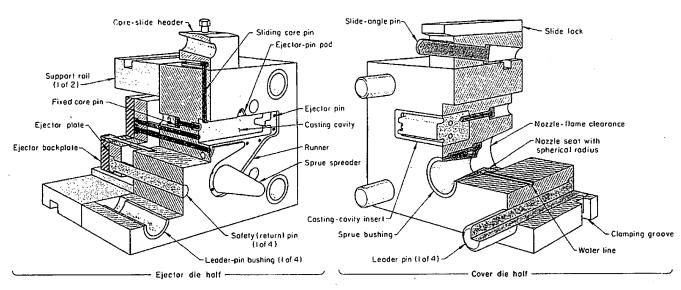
Components of a single-cavity die casting die for use in a hot chamber machine
